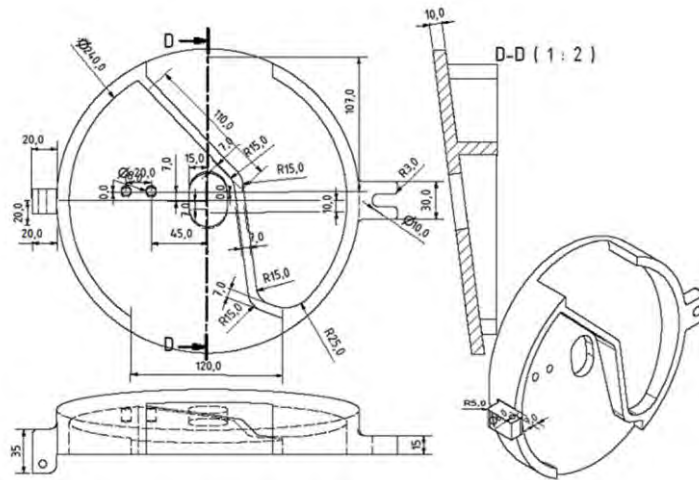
Technical dimensions and view of the left side metering unit in the direction of travel (dimensions are in mm).
